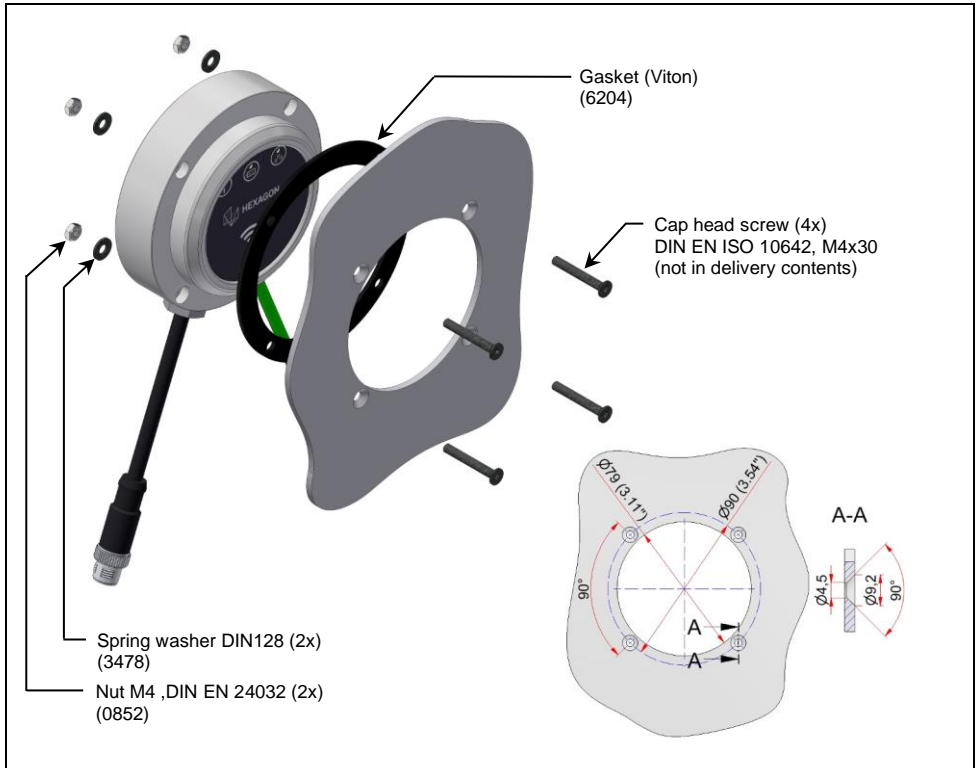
Mounting RC-R-100-R (machine wall, external)
